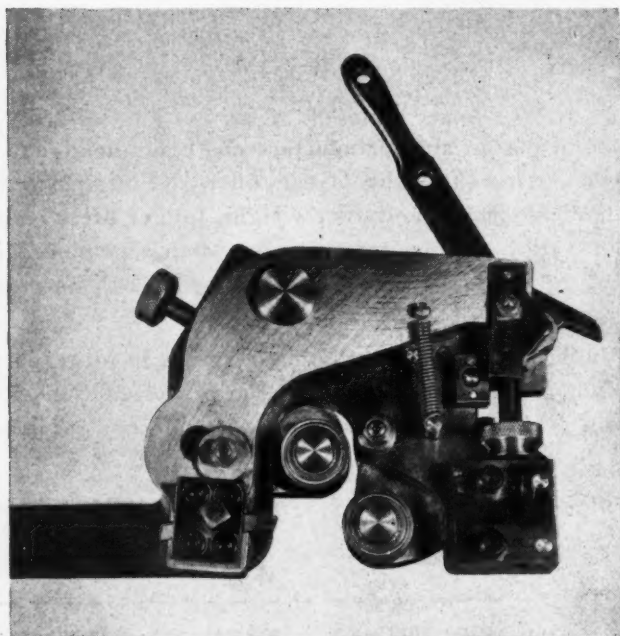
Model A "Micro-Turnthread" Combination Tool-holder and Steadyrest
